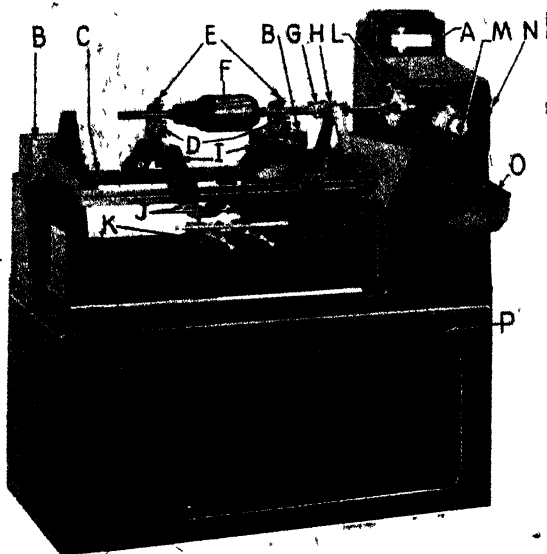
THE OLSEN ELECTRICAL TYPE "E-O" HORIZONTAL DYNAMIC BALANCING MACHINE
